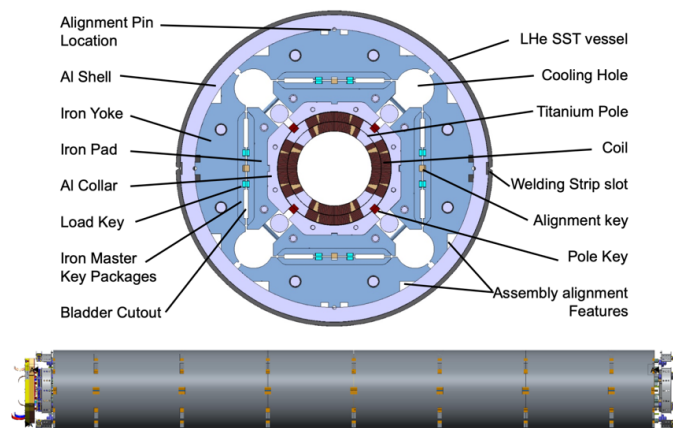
Cross section of the MQXF magnets (top); the LHe SST vessel is added during the assembly of the cold mass. (Bottom) side view of the 4.56 m long MQXFA magnet. The LHe SST vessel is part of the cold mass assembly.
